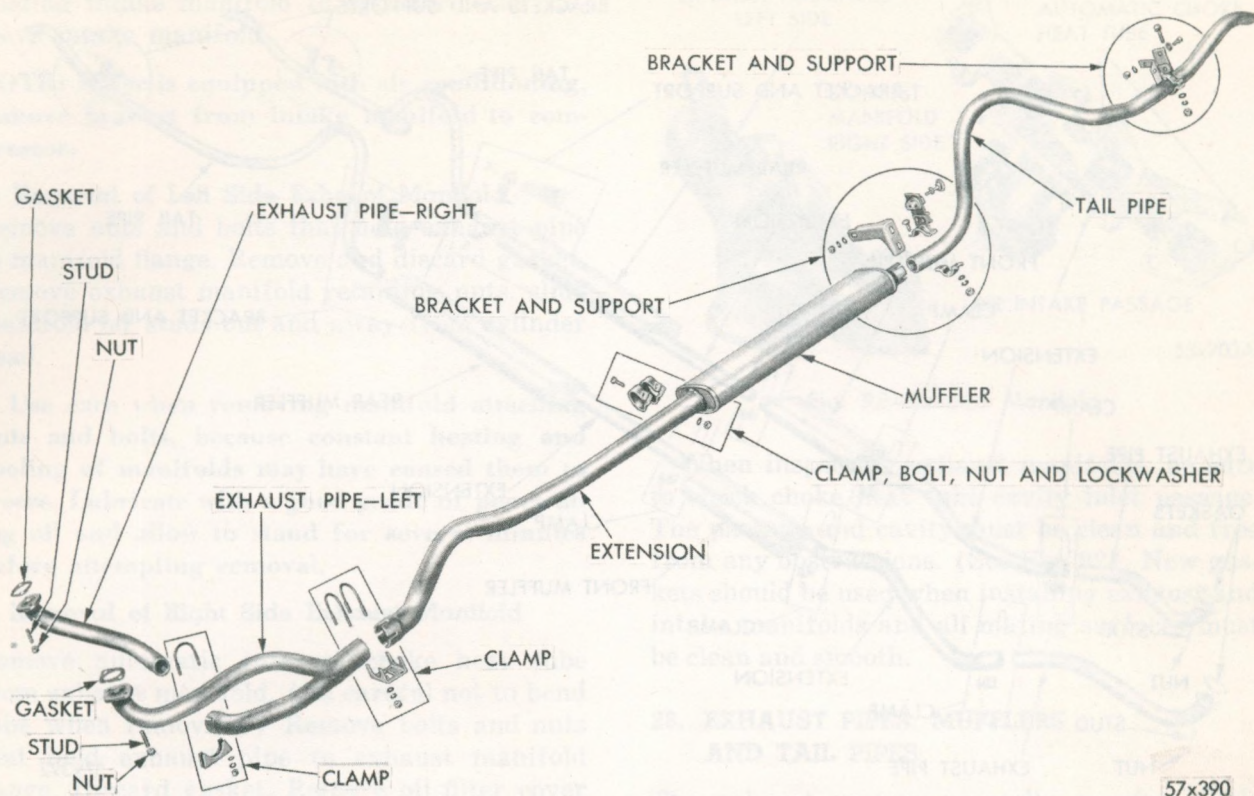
Exhaust System (Single Rocker Shaft Engine)
